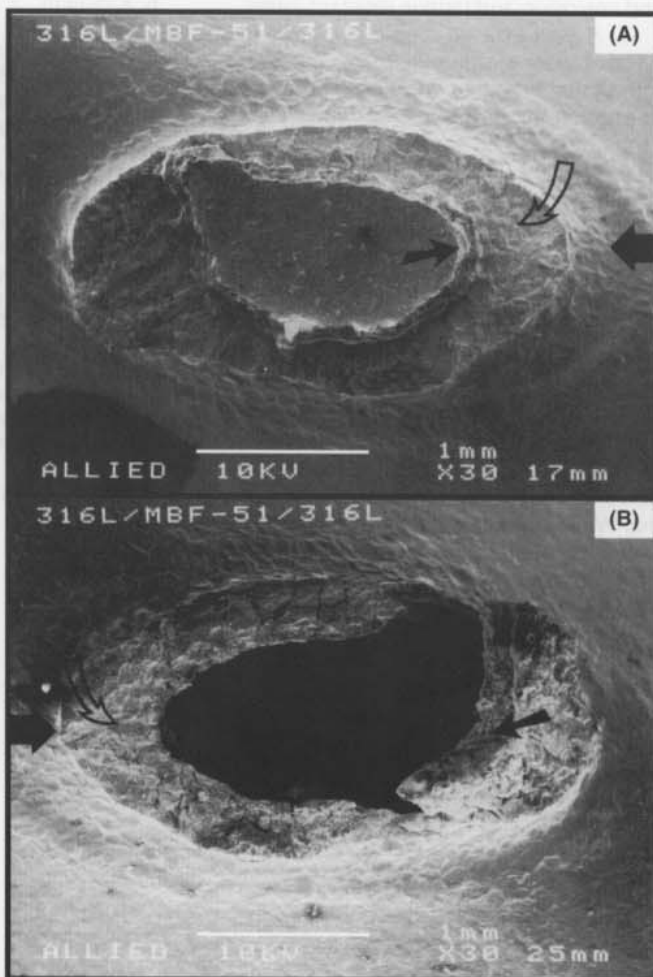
Two SEM micrographs of the matching fracture surfaces of a single brazed spot of a torn apart heat exchanger shown in Fig. 11. The fracture direction is indicated by two large black arrows. Fracture started in the fillet area (empty arrows) and afterwards switched to the base metal (small black arrows).
